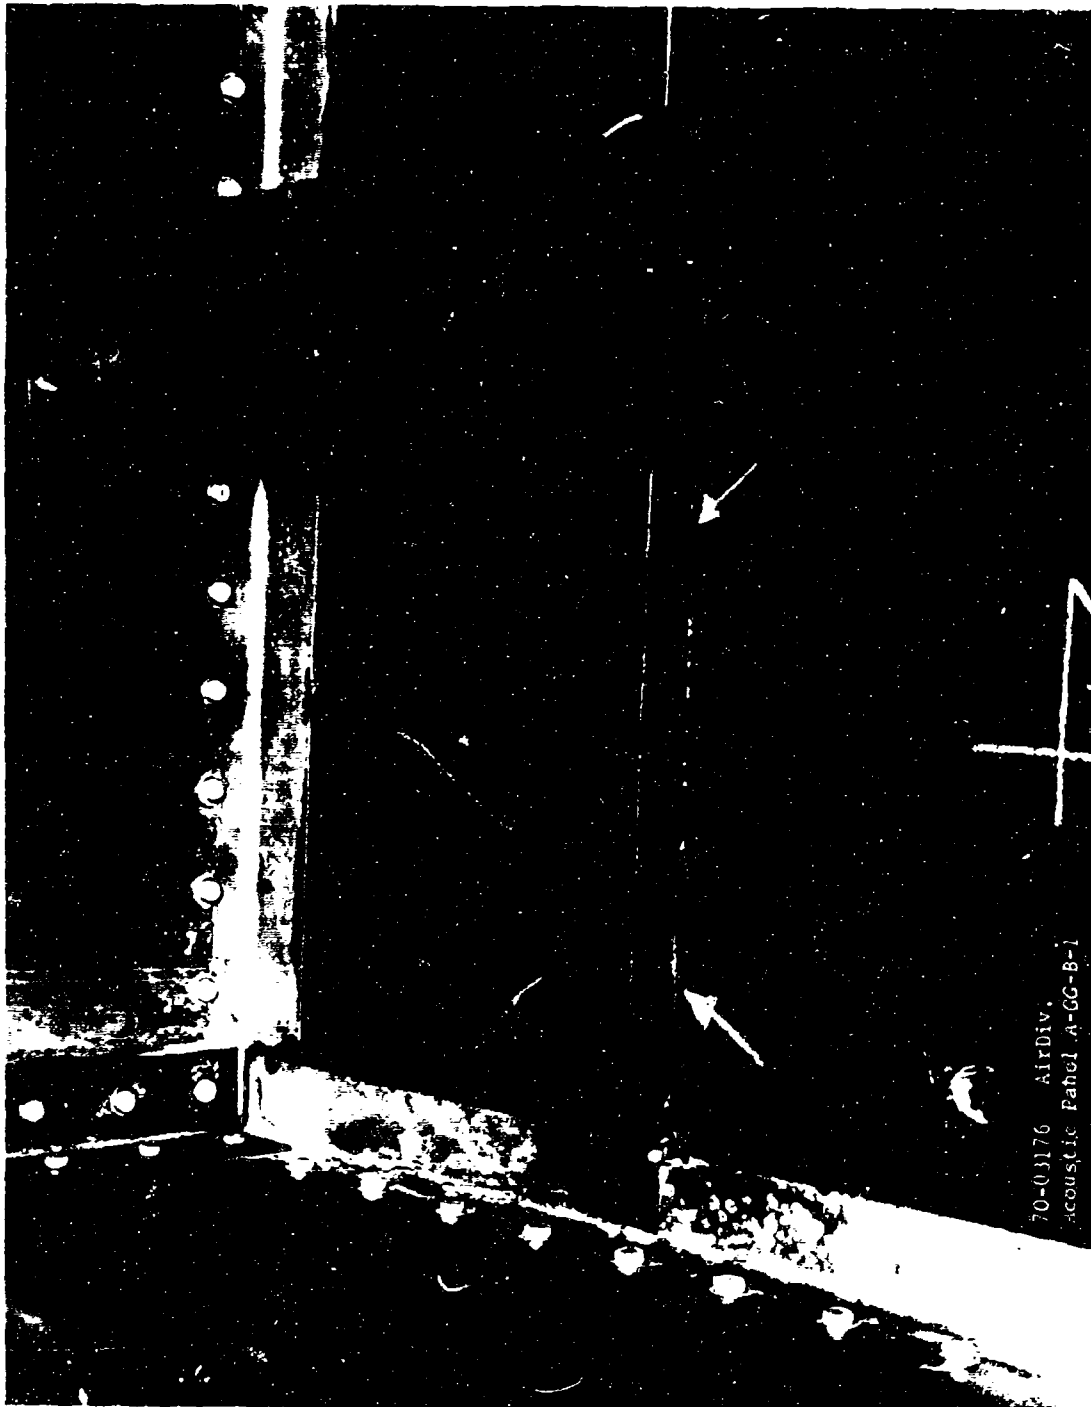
ADHESIVE FAILURE AT TEE SECTION SEPARATING BAYS 4 AND 7
